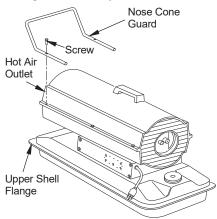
Nose Cone Guard Assembly, 70 Models Only
